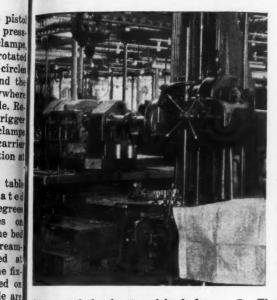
Boring spindle carriers on a Giddings & Lewis horizontal boring mill.
